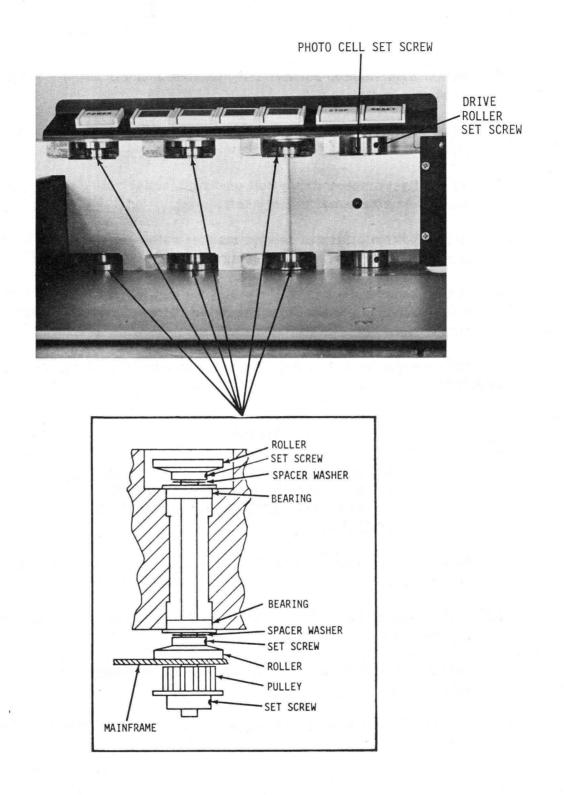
Pictorial, Stacker Roller Bearing Assembly
